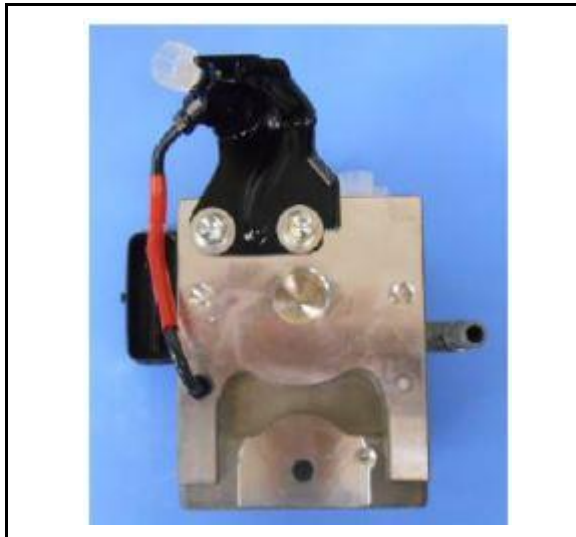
Brake Actuator Tube No. 3 and Brake Actuator Way in the Form of Assembly
